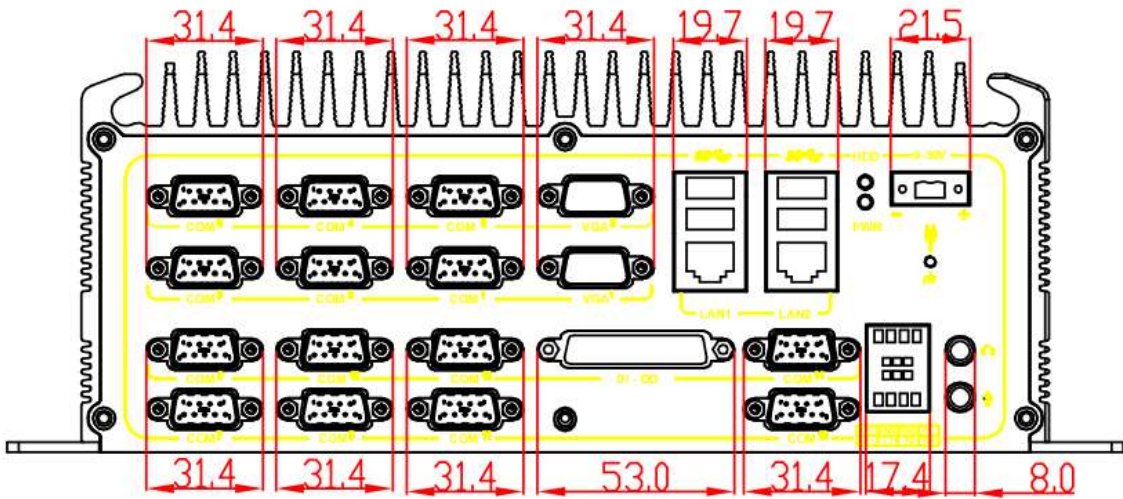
NIS-B988 Side cover mechanical dimension drawing
